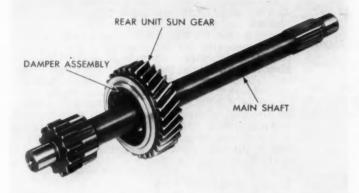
Steel-jacketed, rubber cushion of damper assembly is pressed into rear unit sun gear. Molded splines on cushion fit closely to mainshaft splines. Assembly will absorb 7 deg of tor signal metions.
